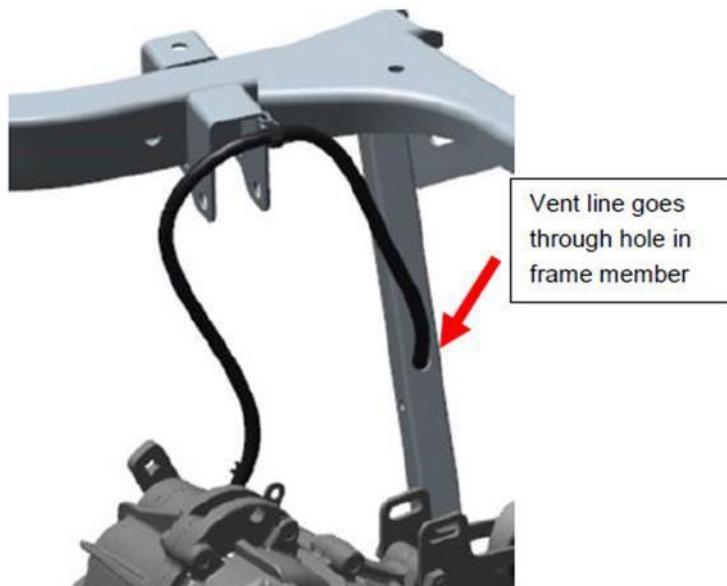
Example of a gearbox vent tube terminating inside a frame member.
